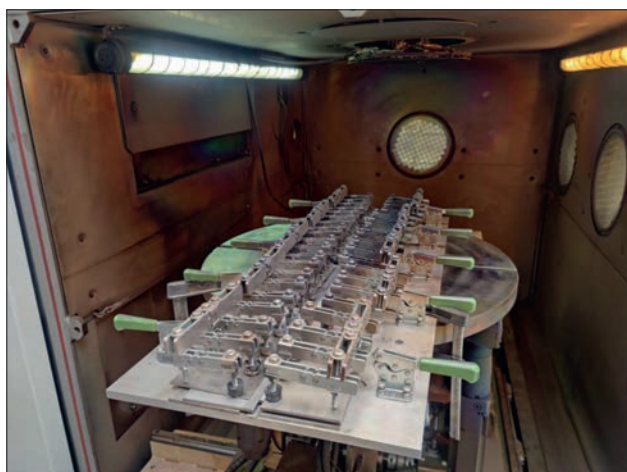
Positioning grip fixed on the work table of the electron beam welding machine
